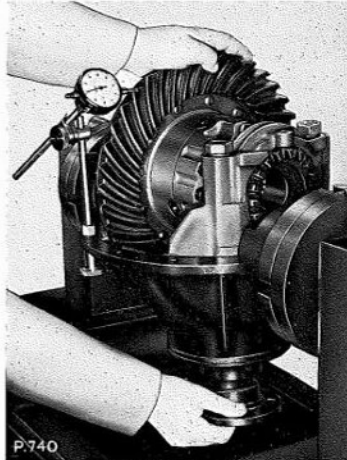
Checking for backlash between the crown wheel and bevel pinion teeth, using the Churchill Tool P.T.4008
